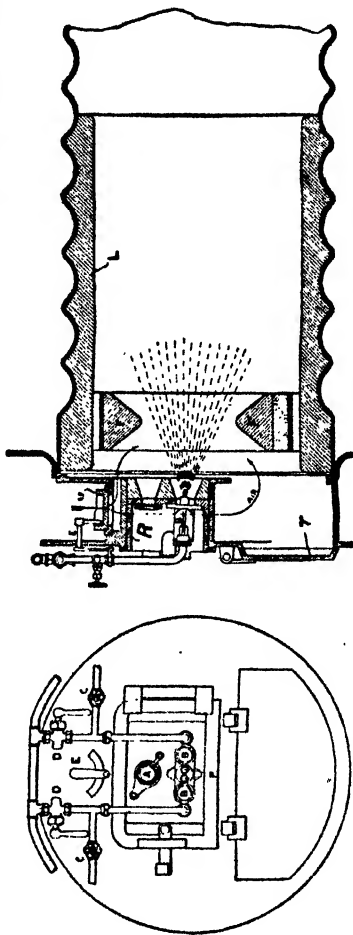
Schutte-Körting pressure-jet oil-burning furnace.
